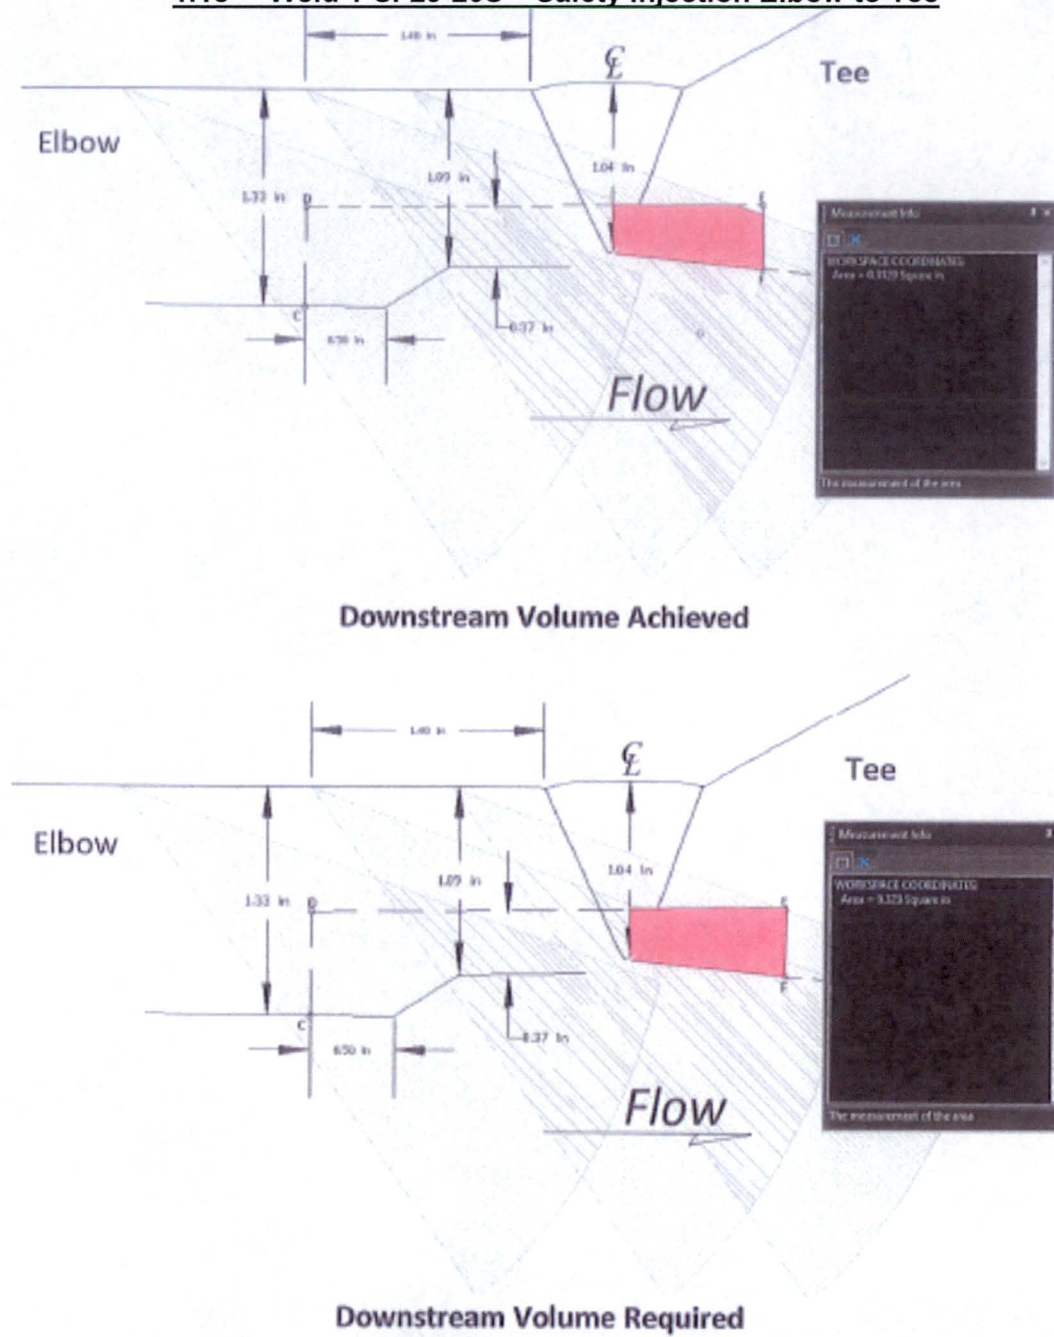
Weld 1-SI-29-20S Coverage Calculation
